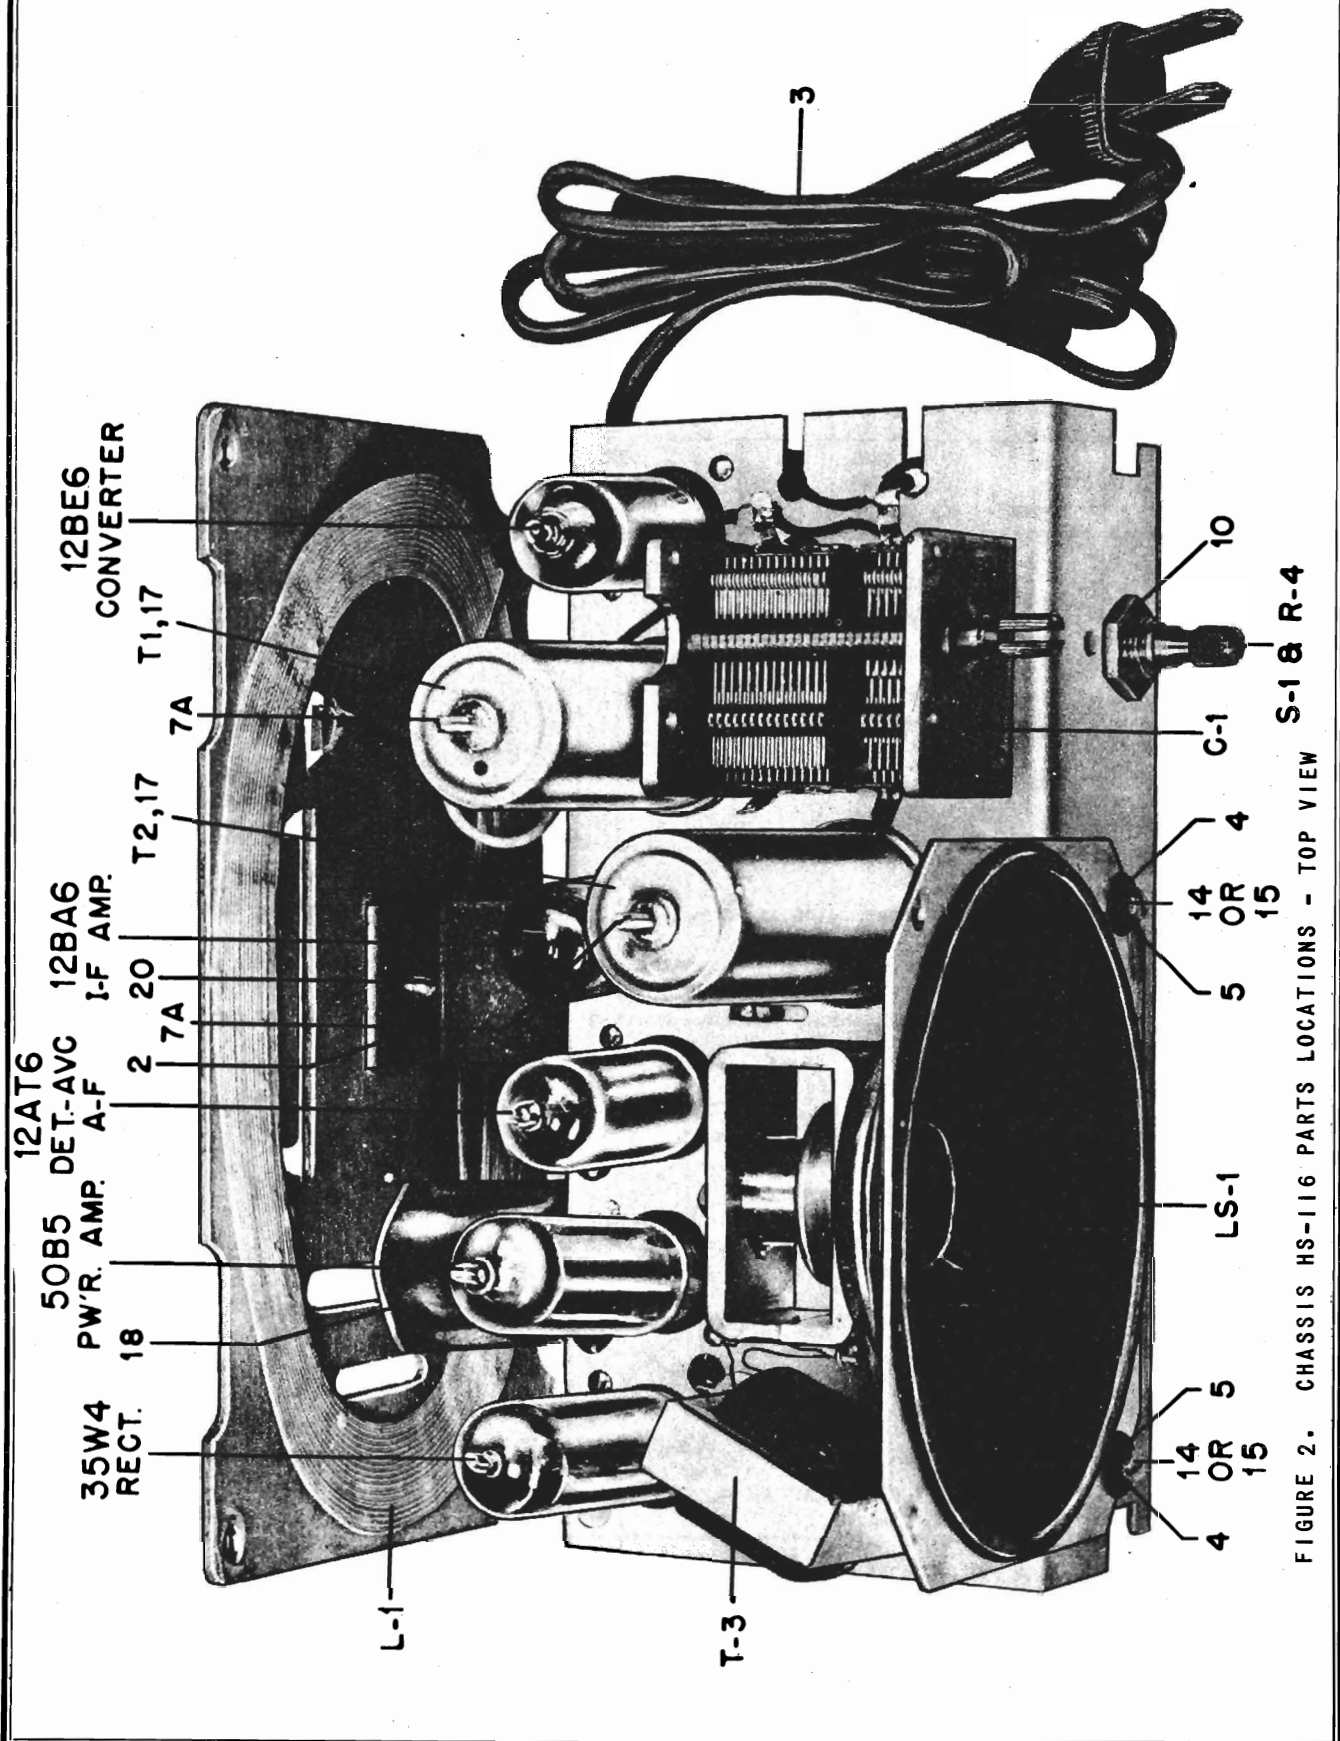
CHASSIS HS-116 PARTS LOCATIONS - TOP VIEW
